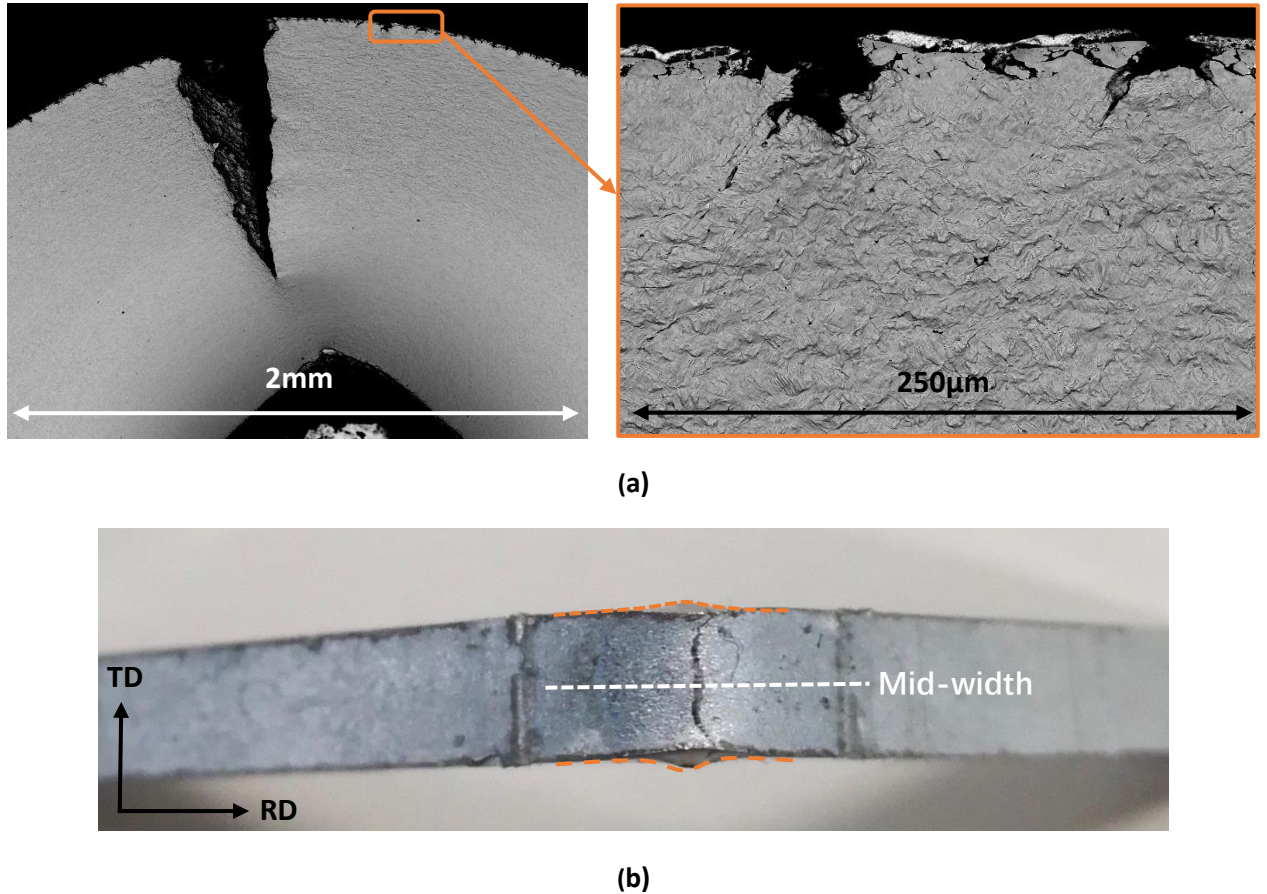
Macroscopic view of the fractured sample, (a), from the cross-section; (b), from the top.
